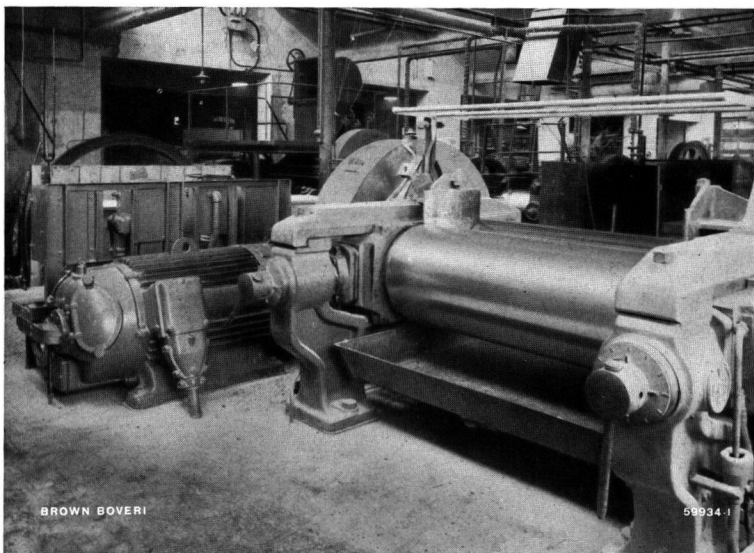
Individual drive of a rubber rolling mill by 80 kW slip-ring motor. In case of emergency the motor is braked in about $\frac{1}{4}$ sec. This method of electrical braking is superior to all other systems.
